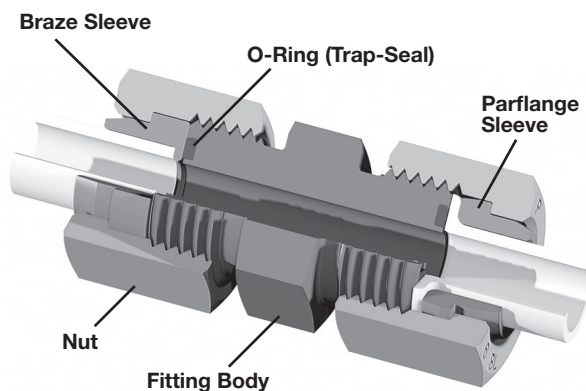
Seal-Lok Union cutaway with flanged and brazed assemblies
